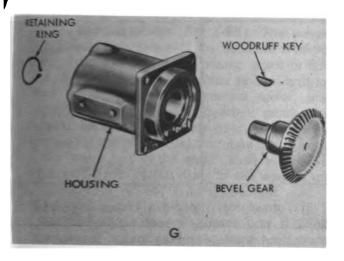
Traversing gearbox no-bak disassembly or assembly (1 of 2).
